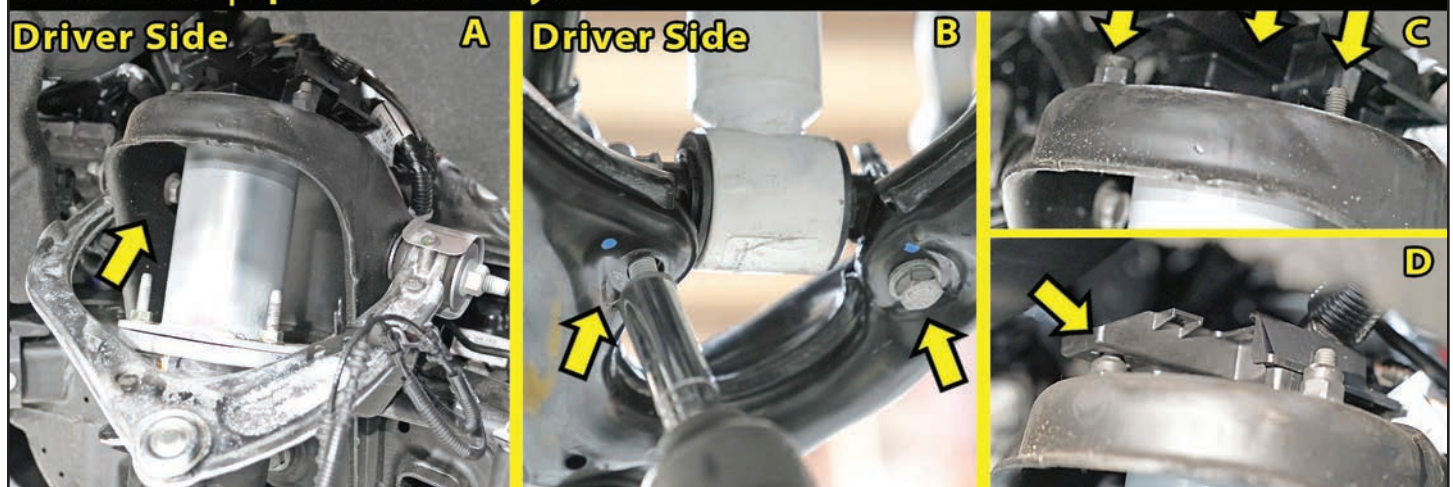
Assemble Strut Spacer onto Strut Assembly...26. INSTALL STRUT | SPACER ASSEMBLY...
